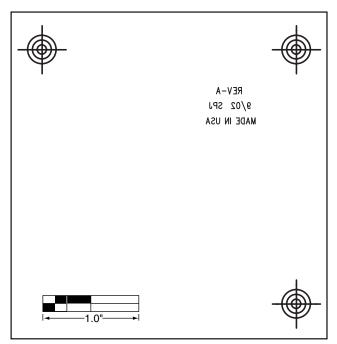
MAX9989/MAX9990 EV Kit PC Board Layout— Bottom Silkscreen
